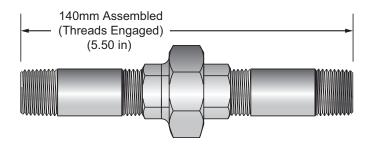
FLS Fluid Seal Fitting and OS Spring-Loaded Oil Seal are used for transmitter assemblies with thermowells and assemblies with fixed immersion sensors (it is not used with WORM sensors). It prevents fluid leak along the sensor sheath so it's ideal for using temperature sensitive paste or heat transfer fluid in the thermowell. It can also be used in air ducts and other applications. Although the FLS provides adjustment precision, it crimps the sensor sheath, and can therefore be adjusted only once (up to 0.50 in).
